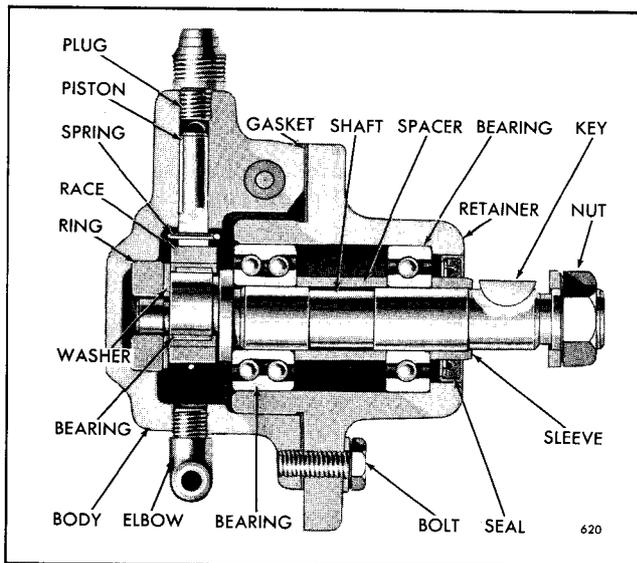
Belt-Driven Hydrostarter Charging Pump
